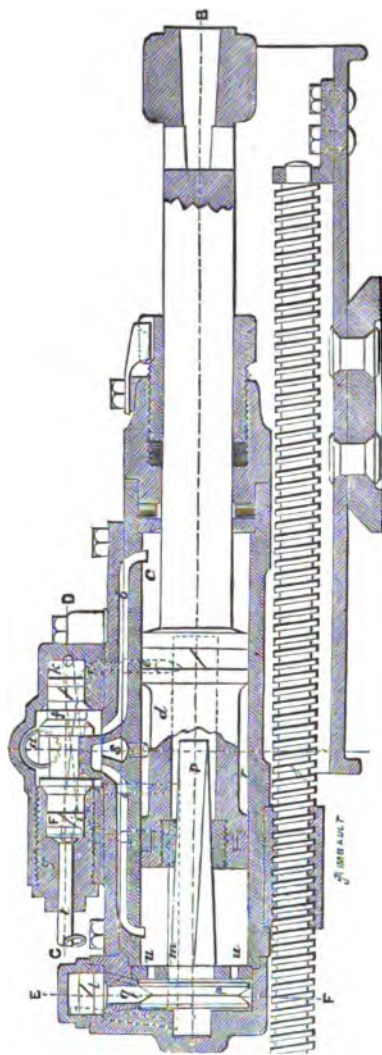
MECHANISM OF SCHRAM'S ROCK DRILLING MACHINE.
